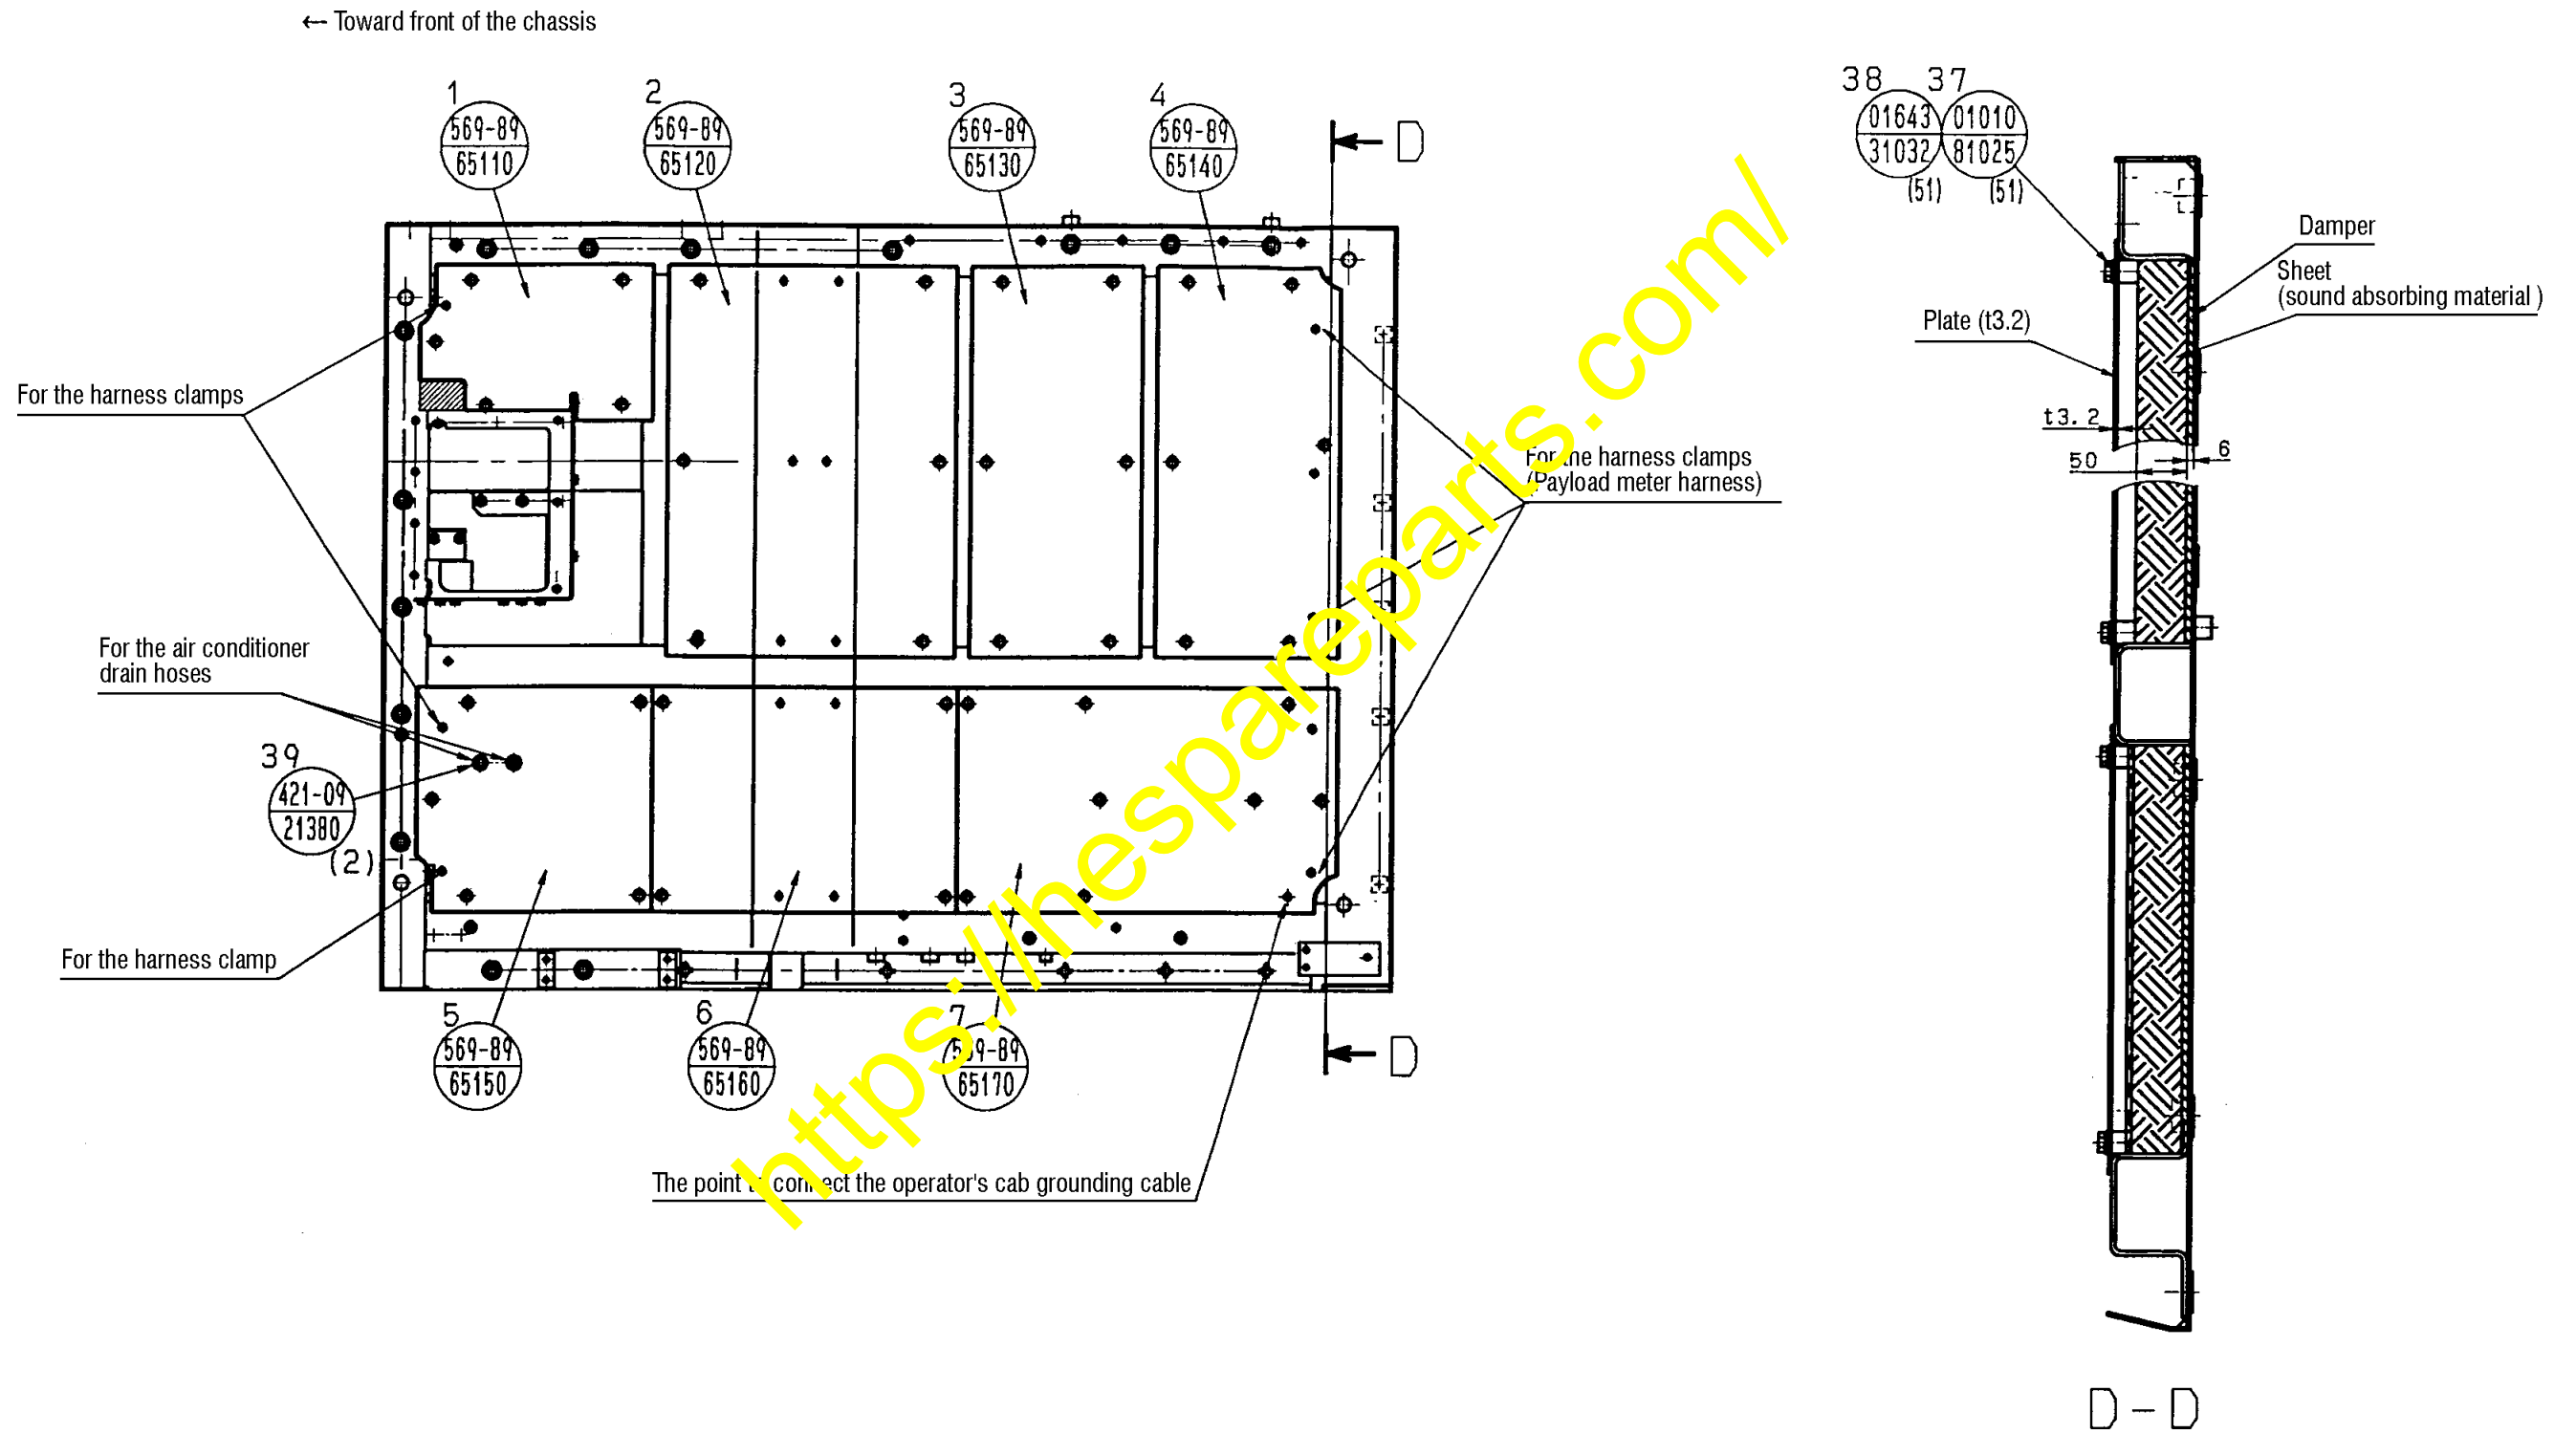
(Drawing for installation of the plates: The above drawing is a bottom view, when looked up from underneath.)
